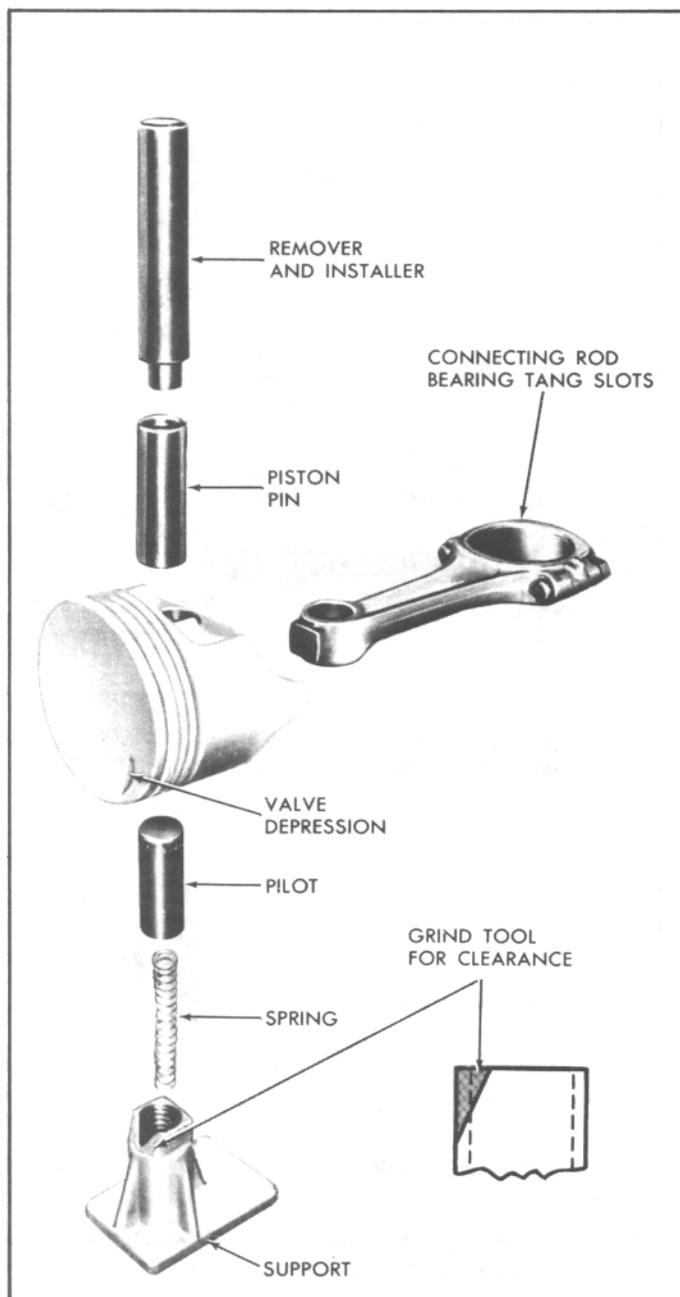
Piston Pin & Tool Layout ("Mark IV V8")
